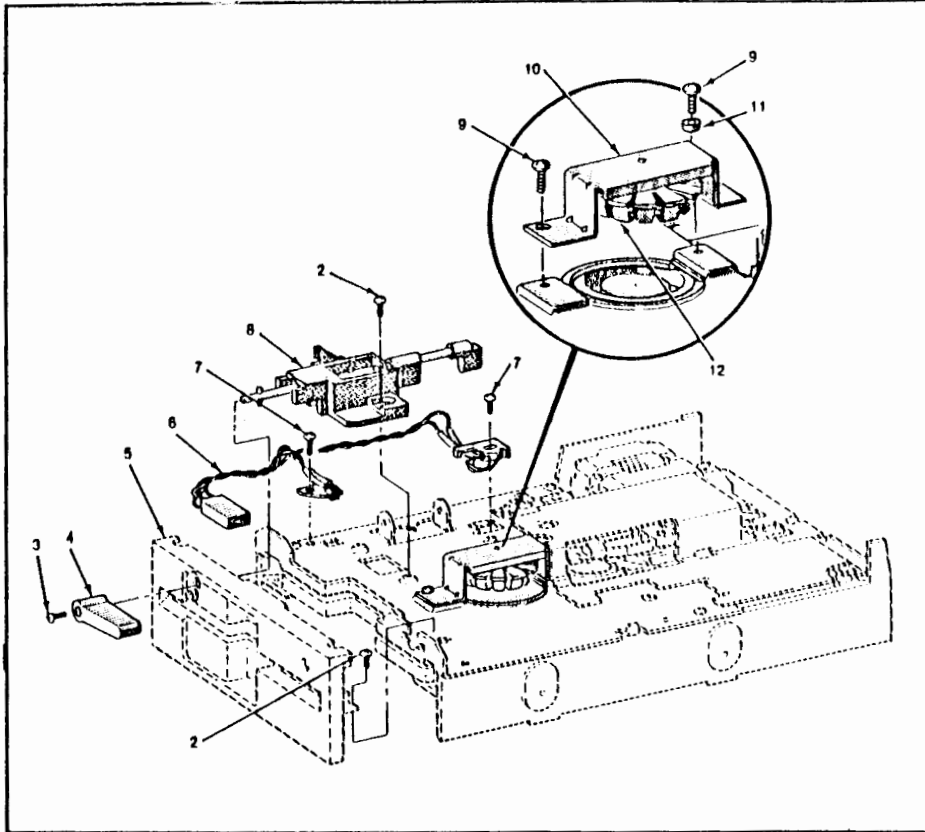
455/465 BASIC DRIVE ASSEMBLY (SHEET 2 OF 4)
